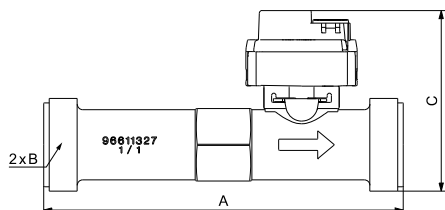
Dimensions, MFS 10-100 l/min, without adapter
